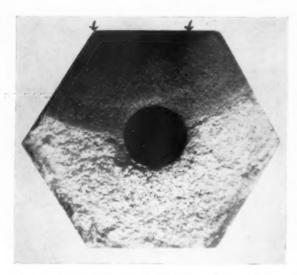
Minute surface flaws forming focal points in originating progressive fatigue fractures.
